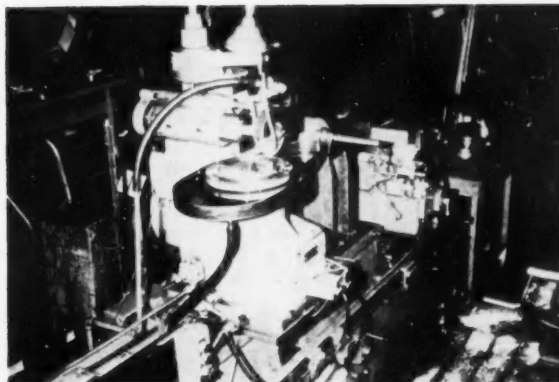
Head of Detroit gear grinder in vertical position for grinding serrations on coupling ring.
